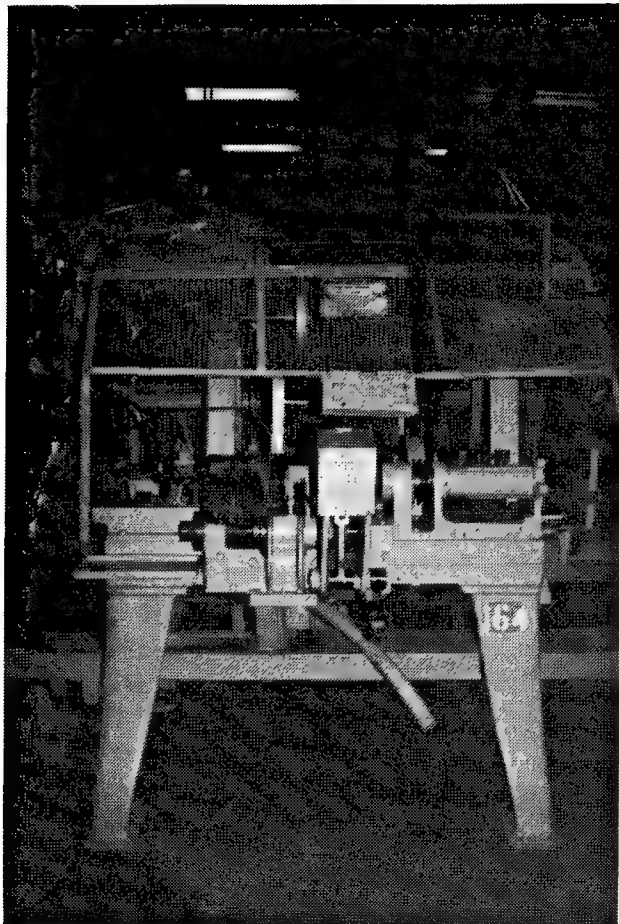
Building 3A: Final Trim Machine manufactured by Fales.
